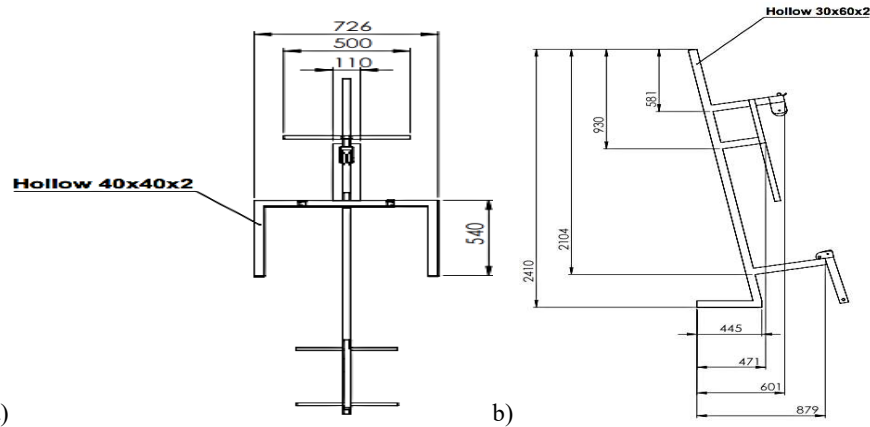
Sketch of multi station training tool for leg extension exercises, a) front view, and b) side view
